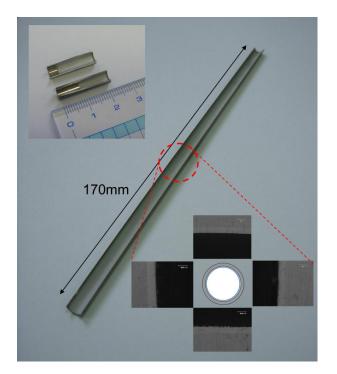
Manufacture of Cr electroplated tube coated at the inner surface
